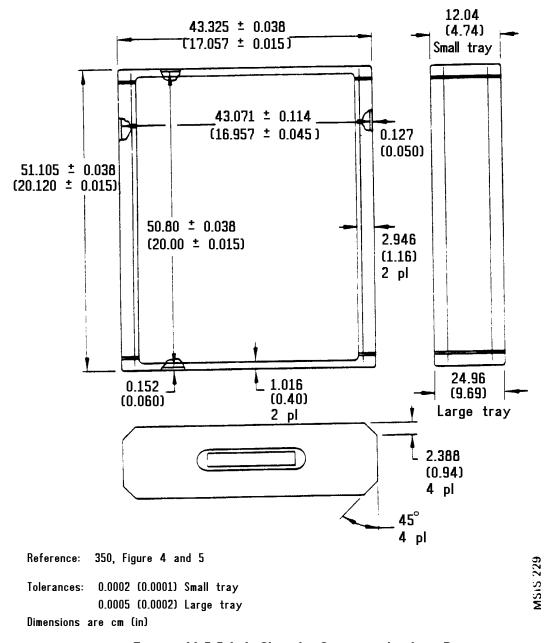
Shuttle Stowage Locker Dimensions
